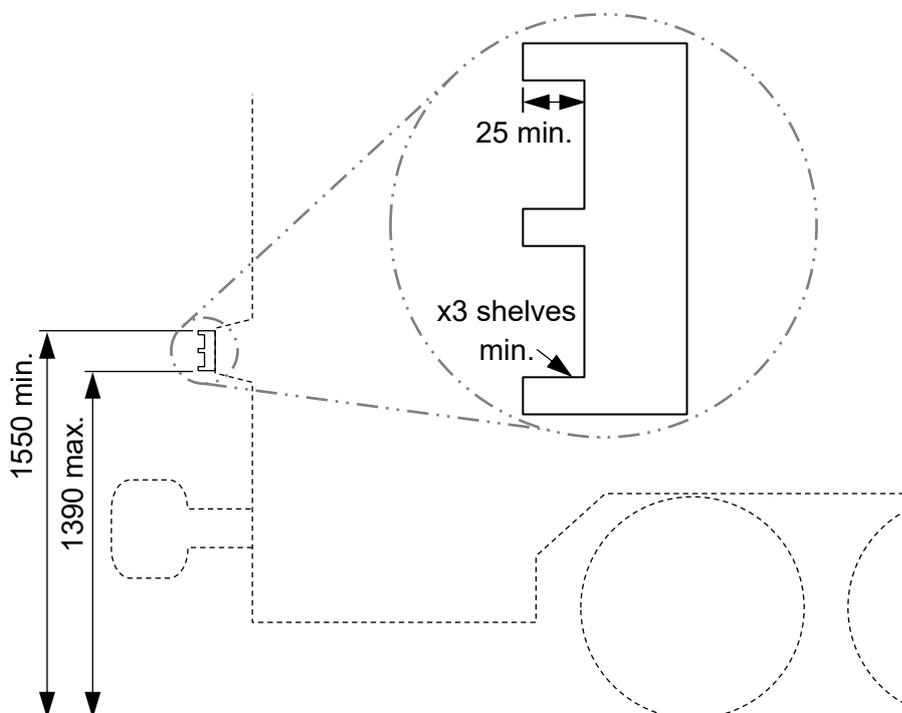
Anti-Climb Device Requirements, Side View (mm)
